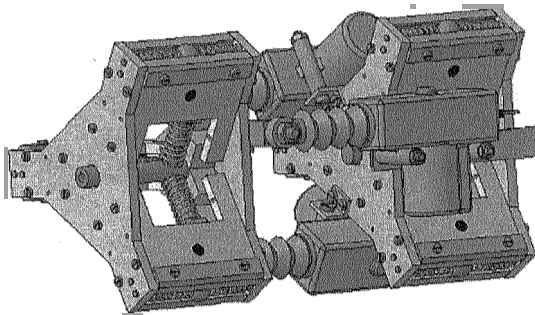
The 3-D scheme of robot with two masses and electrical drives inside in tube.
